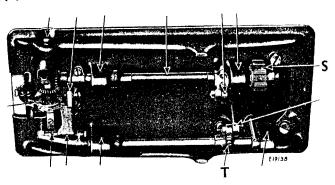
Base View of Machine, Showing Oiling Points also Adjustments on the Machine
